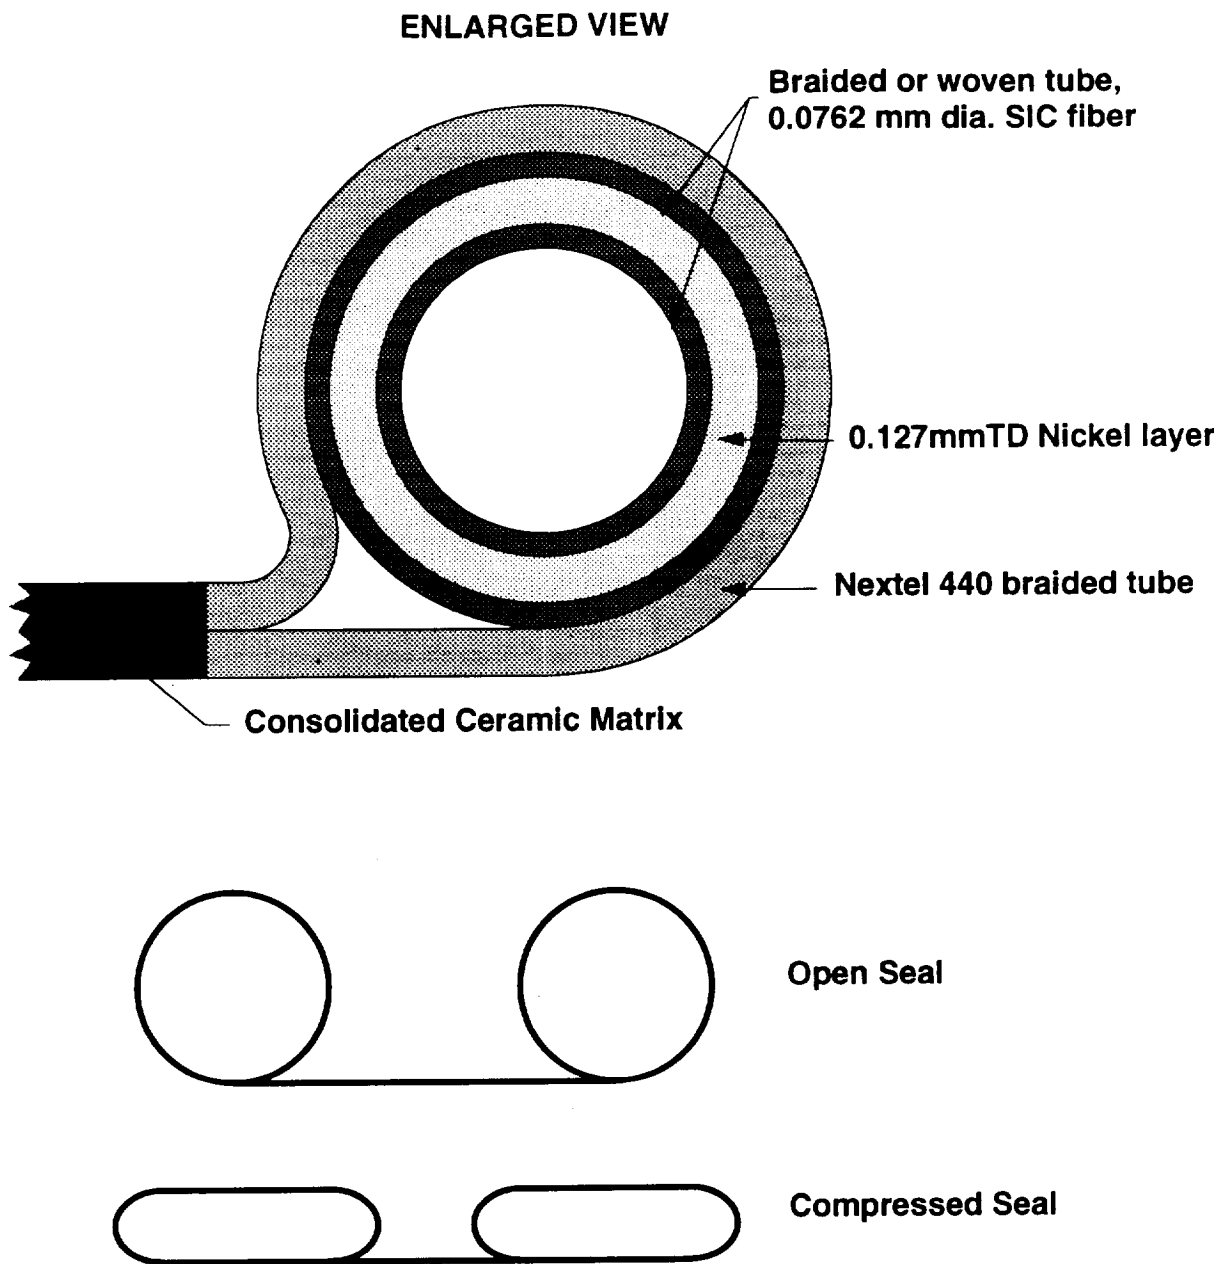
Sealing mechanism for aerobrake panels [18].
